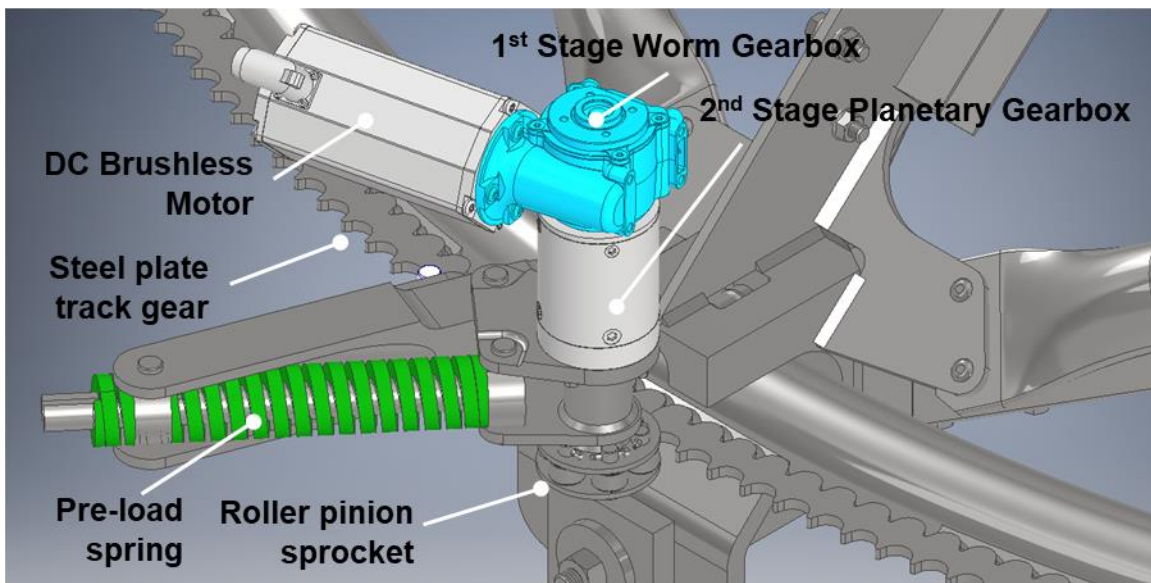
Roller Pinion Gear and Track – BP2 Lifetime Test
